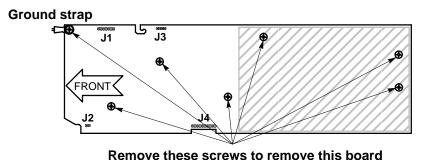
Screws holding the Power Supply circuit board (A1) in place.
